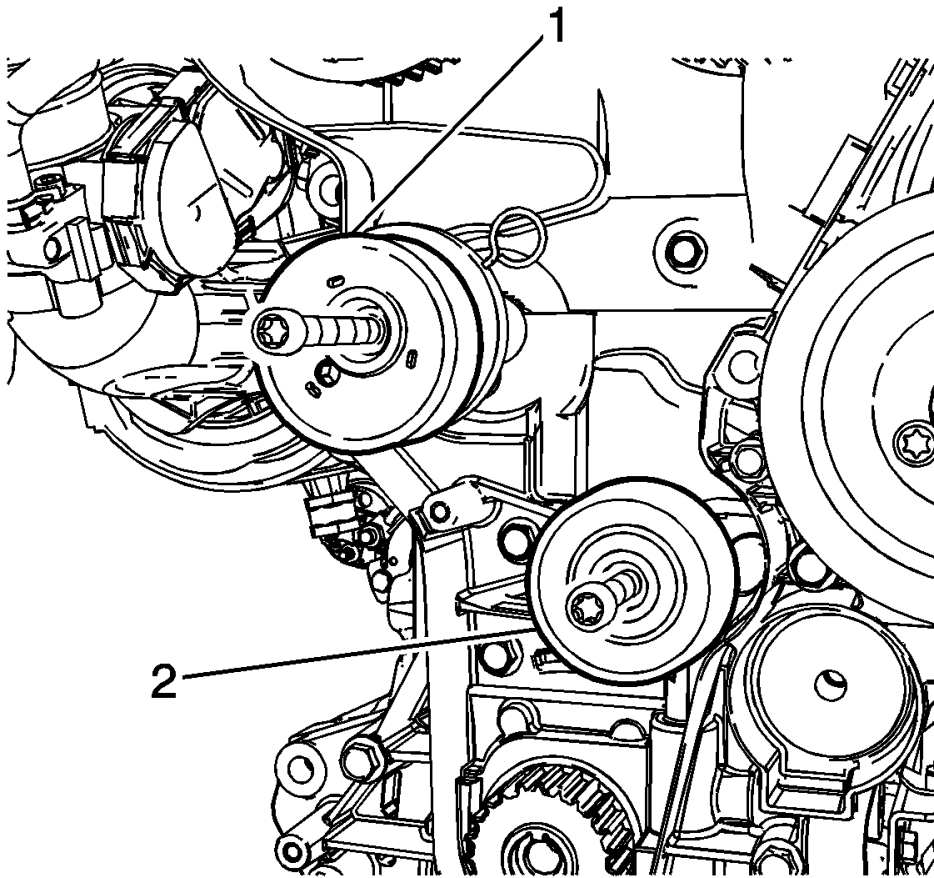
Timing Belt Tensioner & Timing Belt Idler
